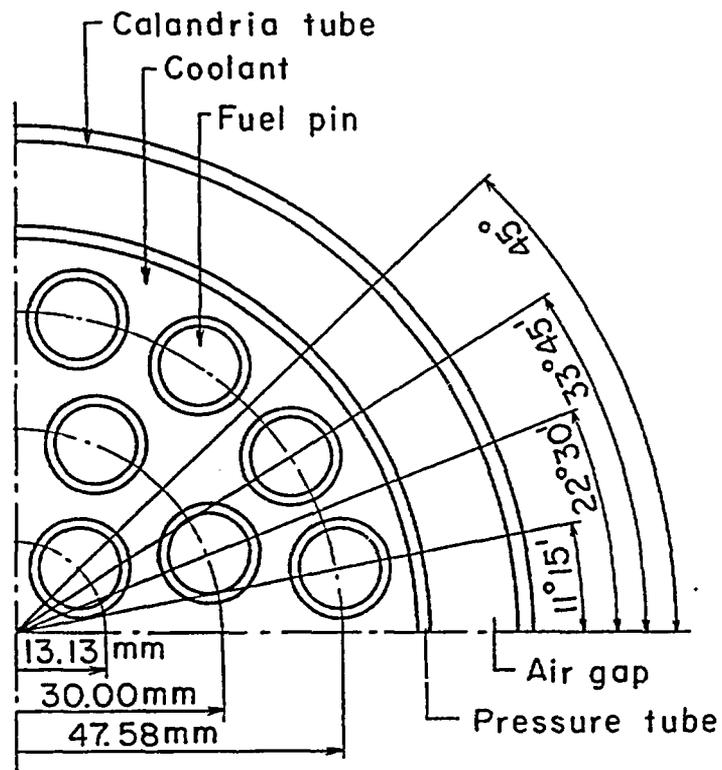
CONFIGURATION OF FUEL ASSEMBLY
